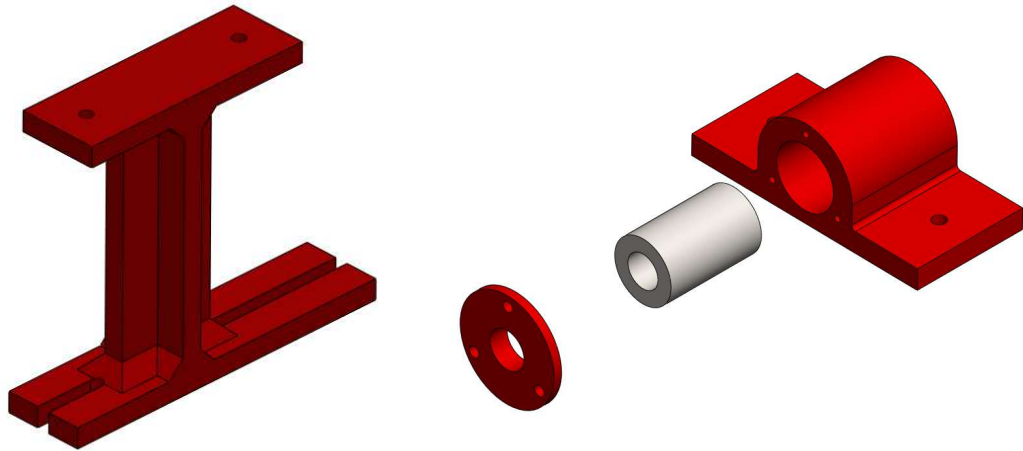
Sliding component, linear bearing representation, bearing blocker and support component
